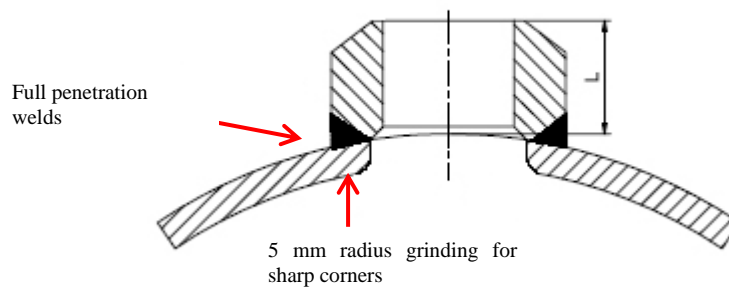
Branch connections shall always be connected with full penetration welds, so that no crevices are formed. Sharp corners shall be ground to 5 mm minimum radius.
